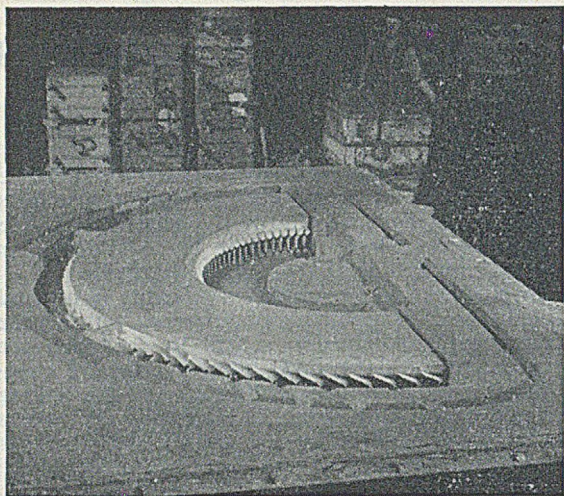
Turbine-diaphragm Mould (10-ft. dia.), with its Core in position, ready for Pouring.
